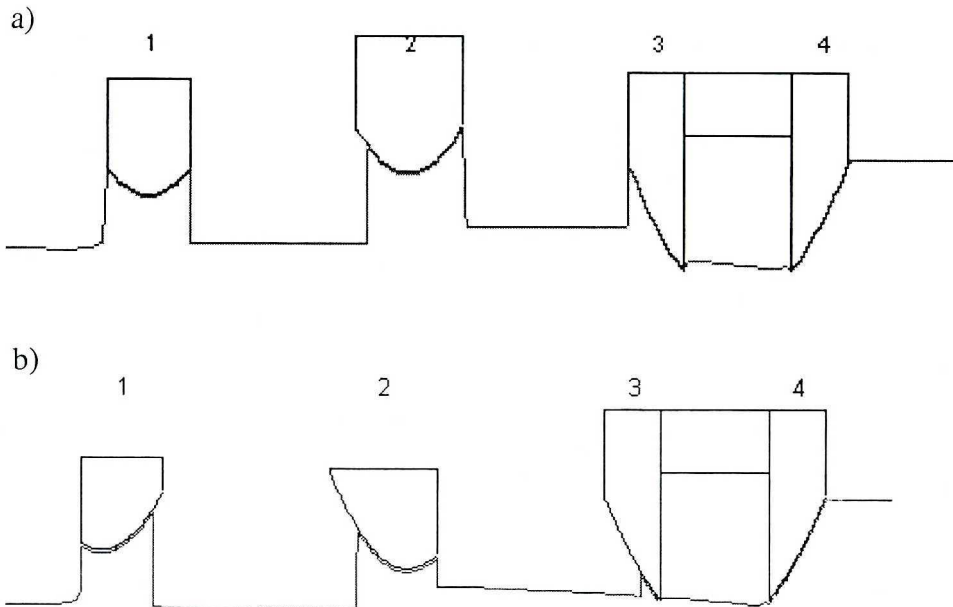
Two considered ring pack geometry versions: a) symmetric ring profiles, b) asymmetric ring profiles (1 – compression ring, 2 – scraper ring, 3 – upper lip of the oil ring and 4 – lower lip of the oil ring), the continuous line represents the hypothetical oil film surface
